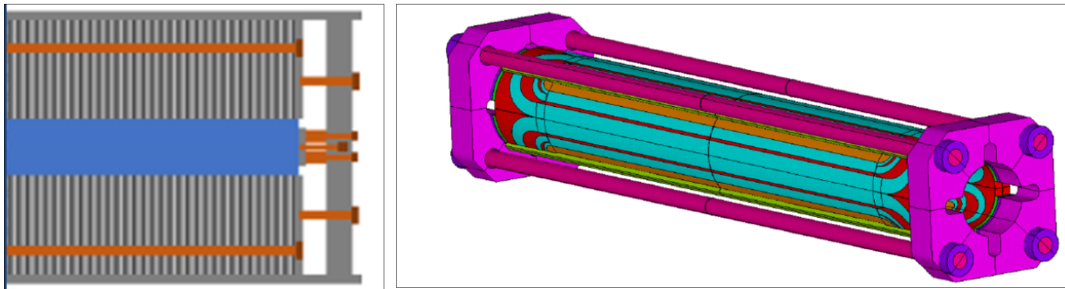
Example of axial support systems. Left: the coil ends (blue) are supported by an end-plate with bullets. The endplate is welded to the external shell. Right: two end-plates are connected by four aluminium rods.
